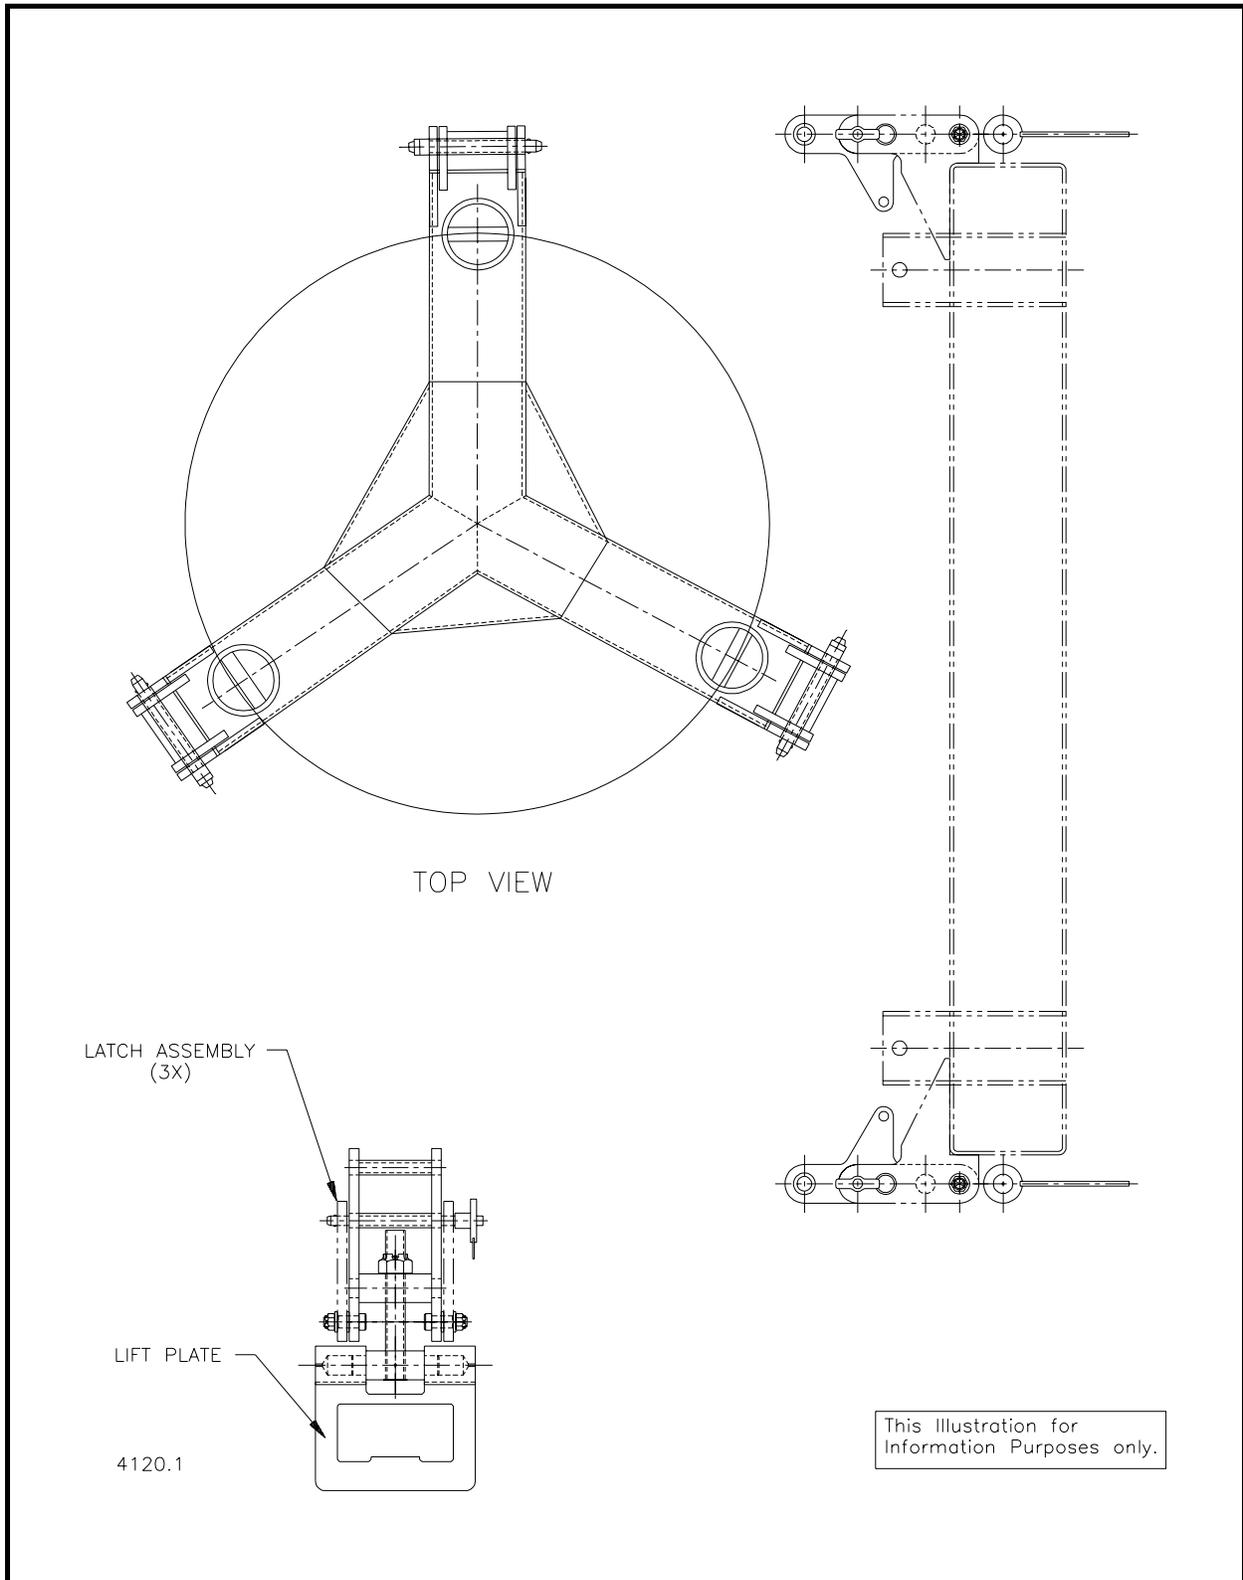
, Ten Drum Overpack Lift Fixture Adaptor
